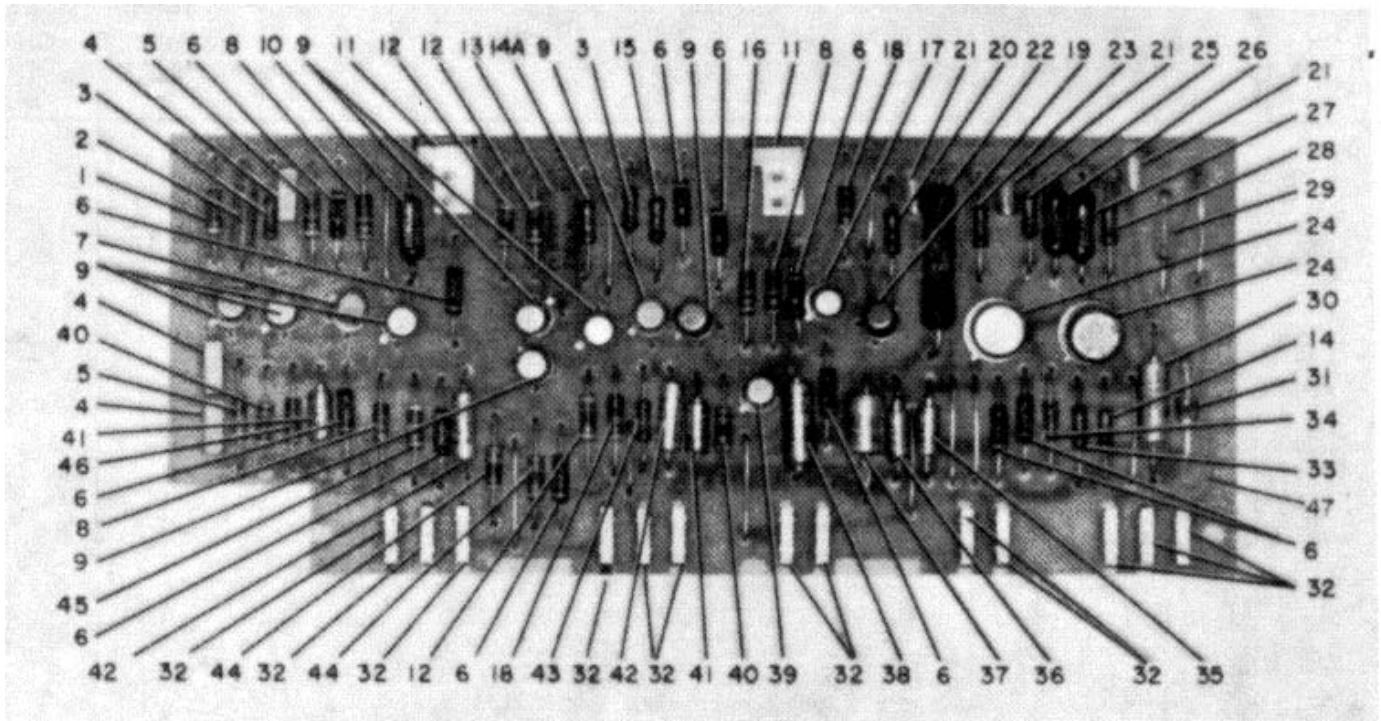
Power Supply and Reply Evaluator Assembly (A3)
